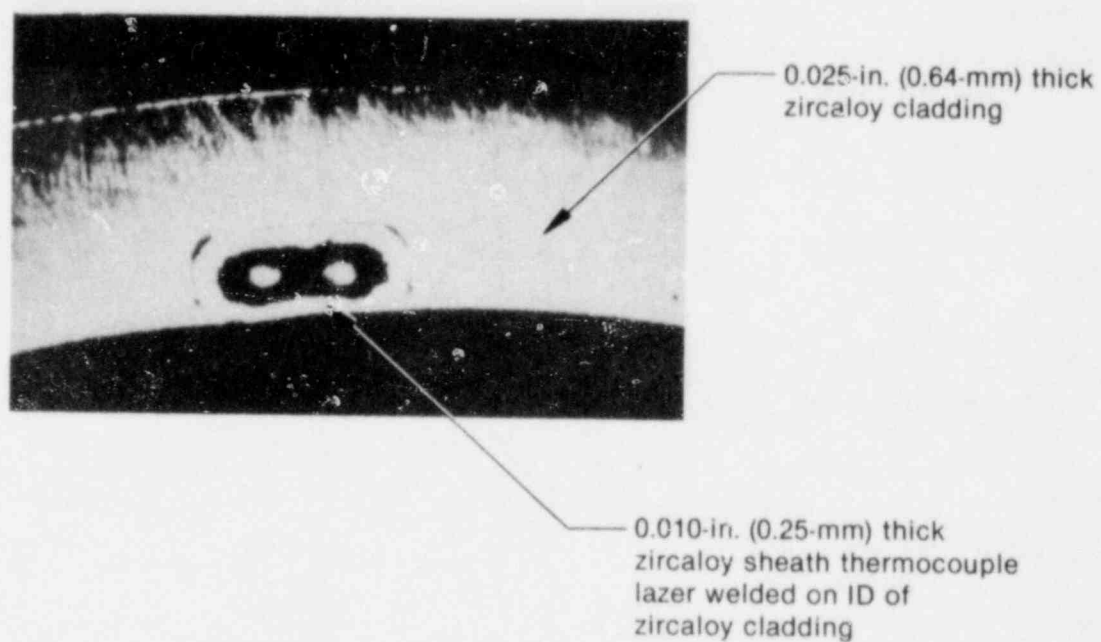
Cross-sectional view of 0.25-mm thick embedded thermocouple proposed for LOFT fuel rods.
